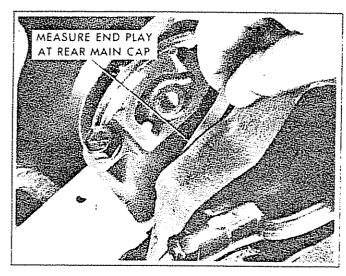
A2-40--Measuring Crankshaft End Play - Typicar (V6 Shown)
